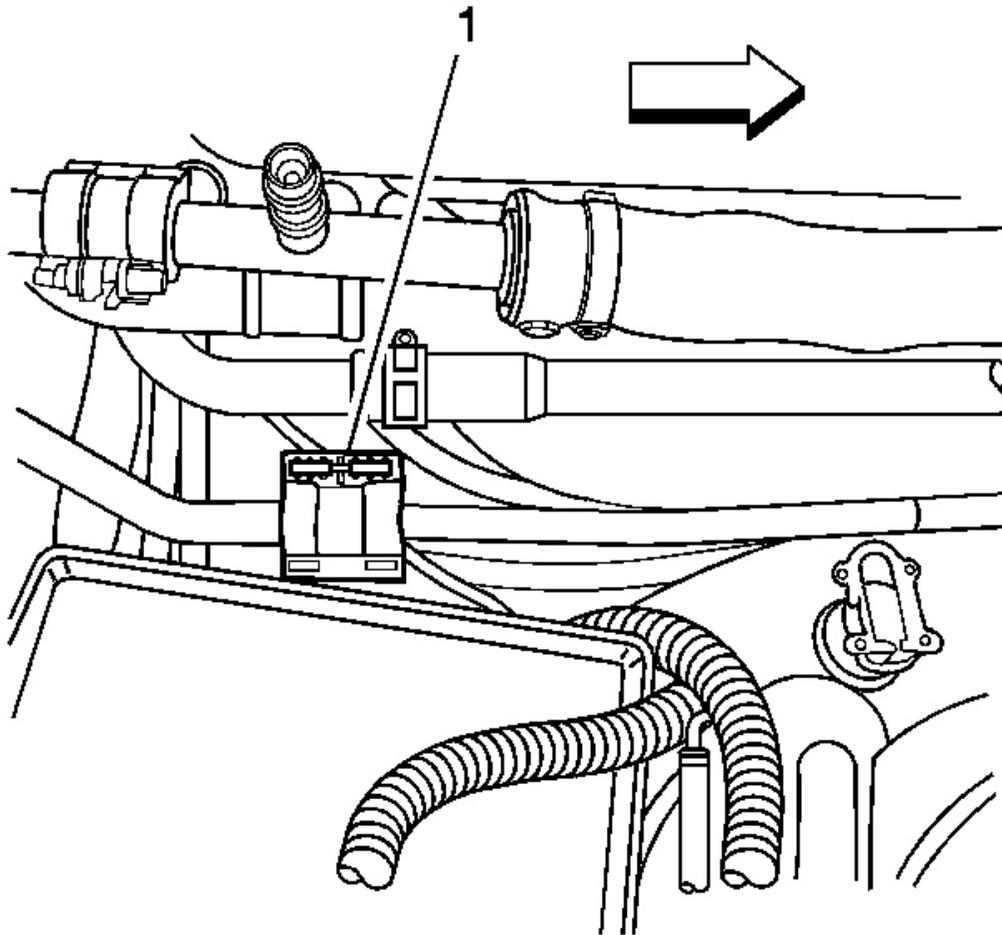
A/C Tube Connector At Evaporator Rear Line Assembly
